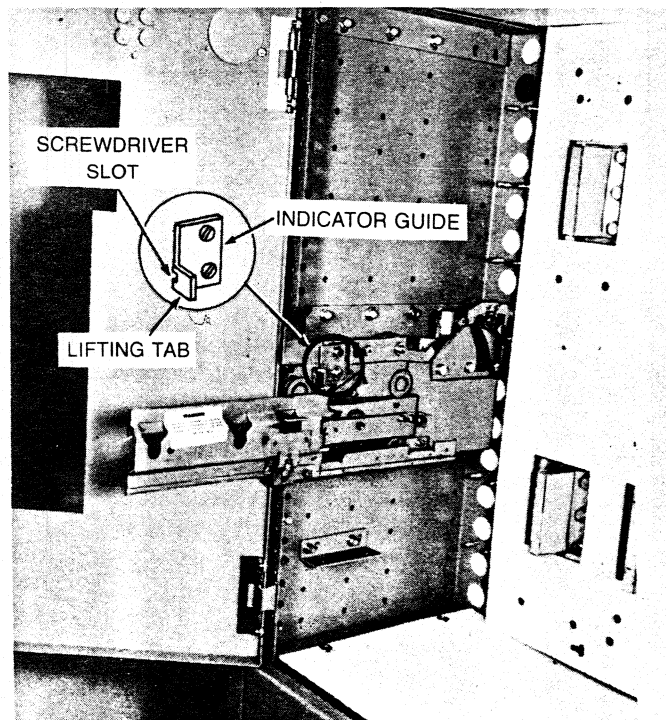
RAIL AND CAM ASSEMBLY—LEFT SIDE
